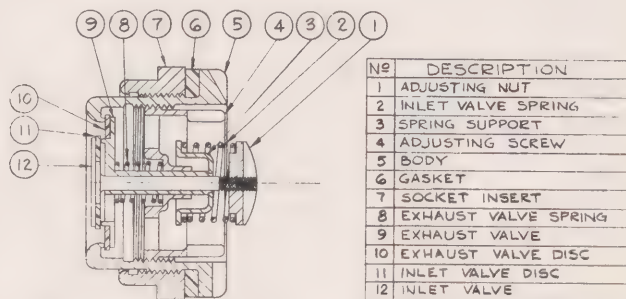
Suction socket stocking plug with inlet and exhaust valves.
